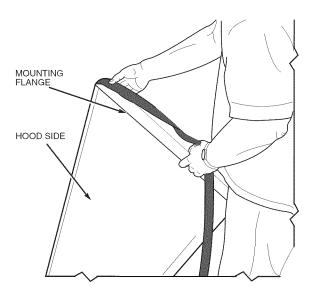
Adding Seal Strip to Sides of Hood Top Mounting Flange
